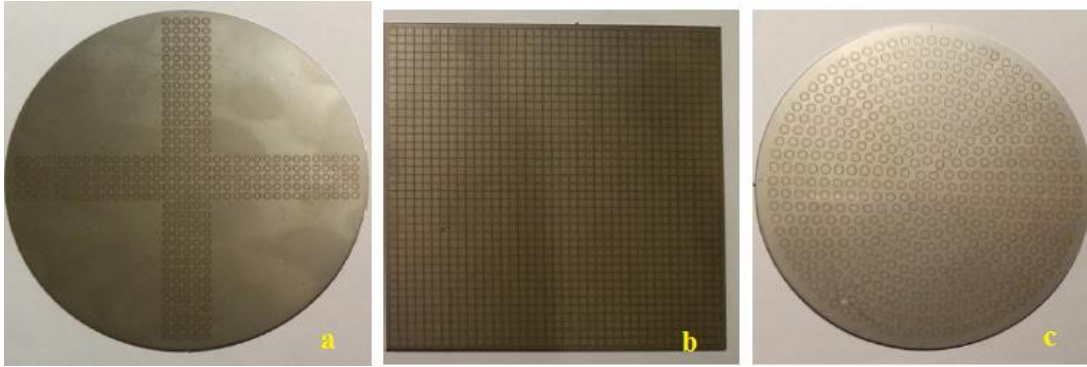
Marked specimens a) specimen for cylindrical cup drawing test b) specimen for squared-cup drawing c) specimen for Erichsen test
